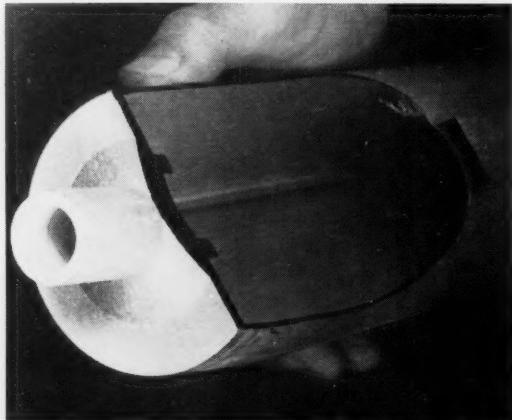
shows a one piece shrouded rocket tail fin. Fabricated as a one-piece heat treated impact, it replaced an unreliable six piece welded assembly of lower strength and unacceptable tolerances.
